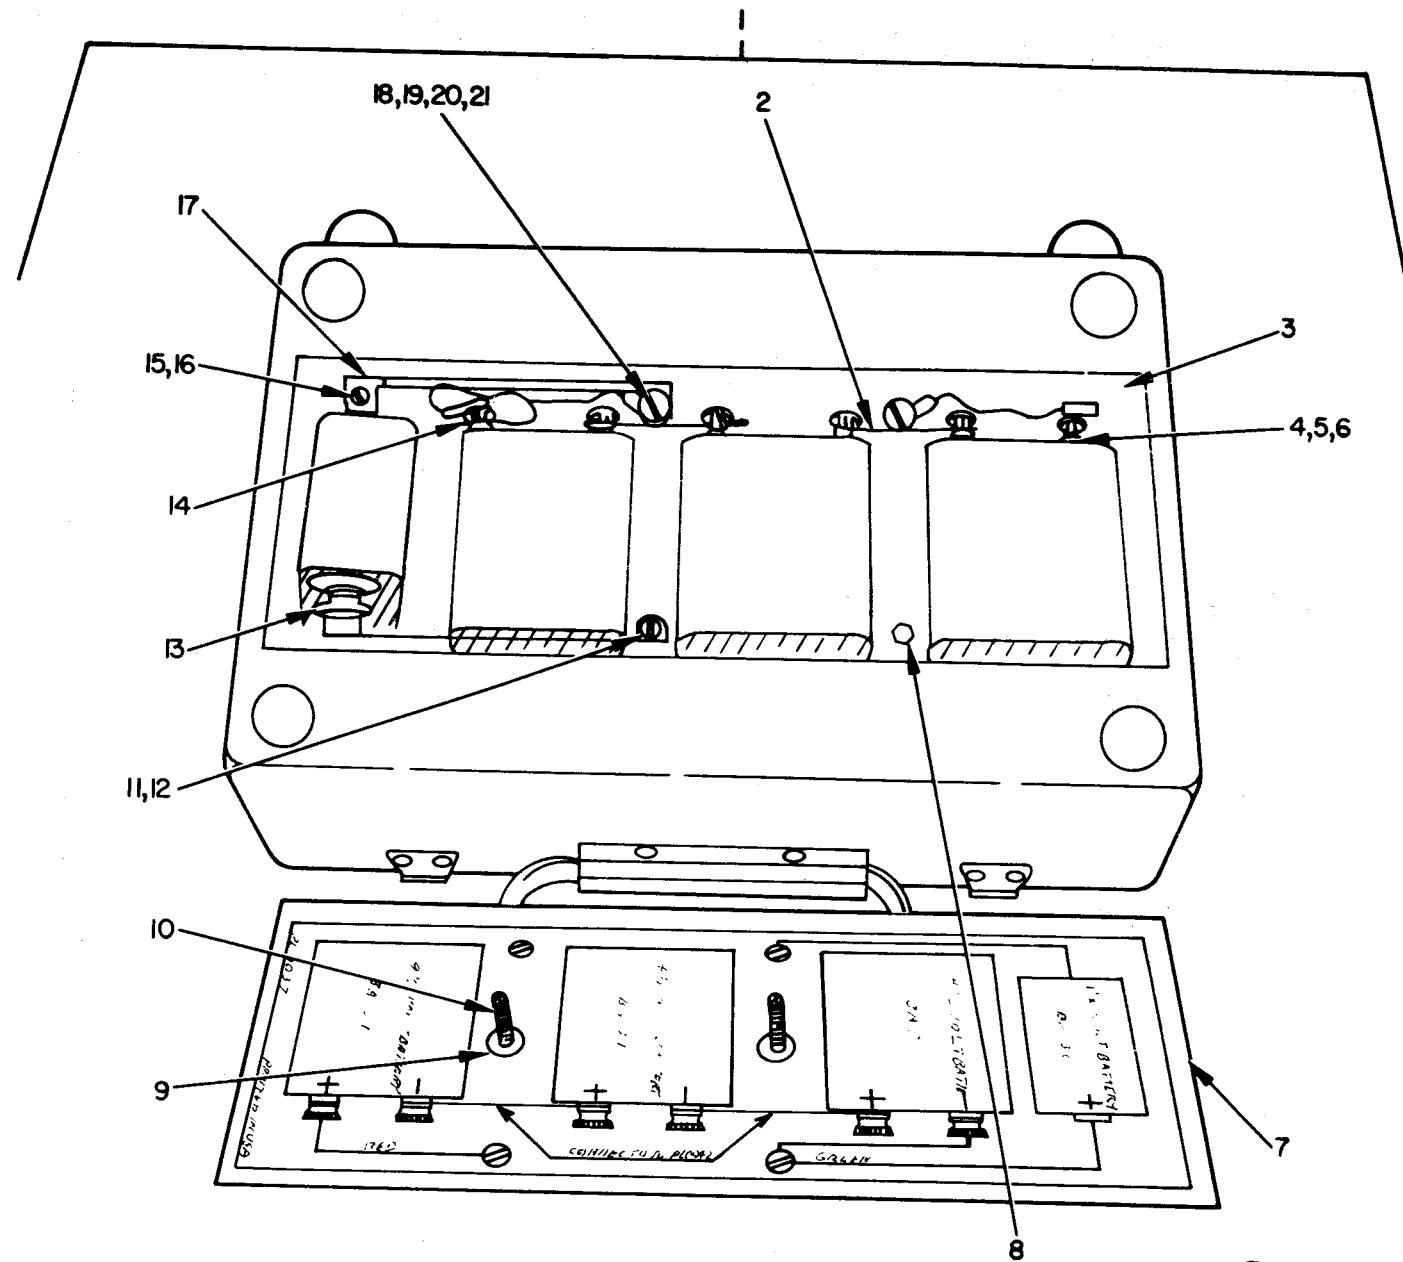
Multimeter TS-352B/U, Battery Box Assembly.
